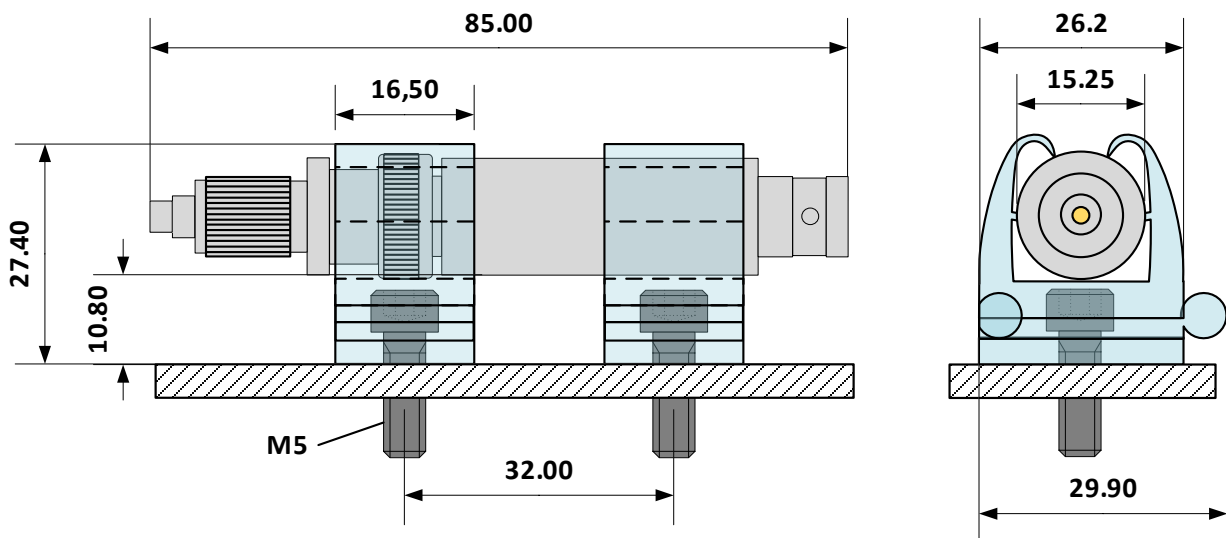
Dimensions of ICA10 & ICA1 with holders (in mm)
